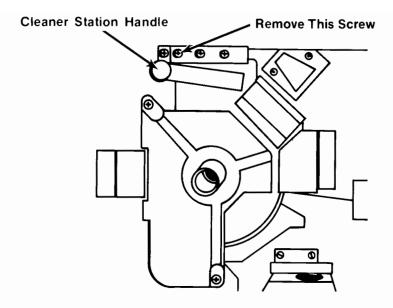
Drum Cleaner Assembly (Installed in Printer)
